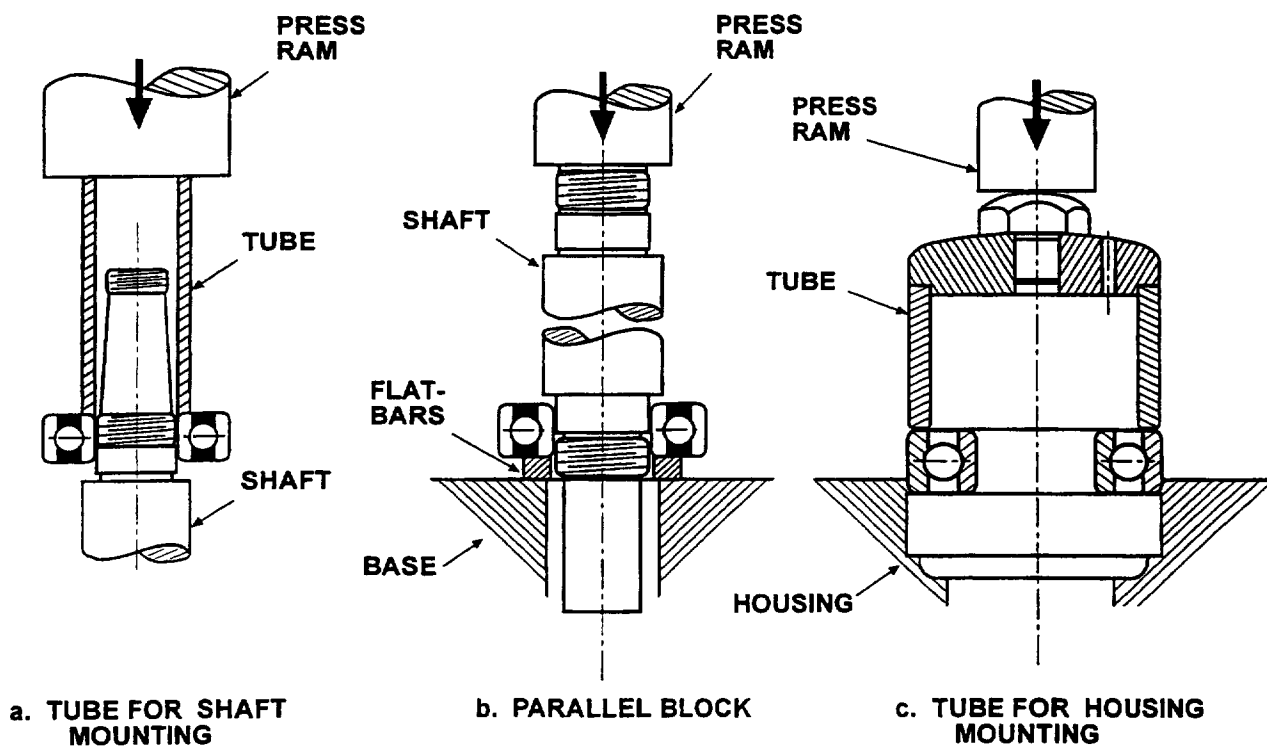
Pressing Bearings on Shaft with an Arbor Press
